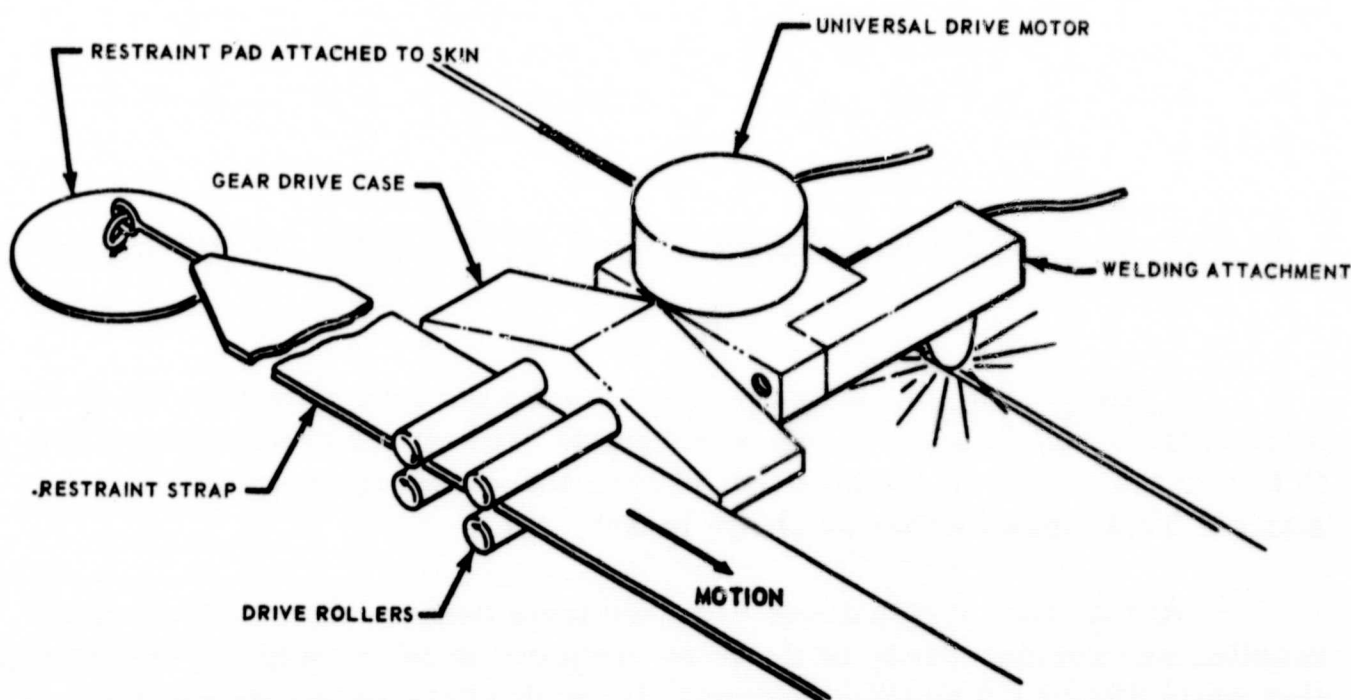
GENERAL SPACE SURFACE DRIVE MECHANISM
